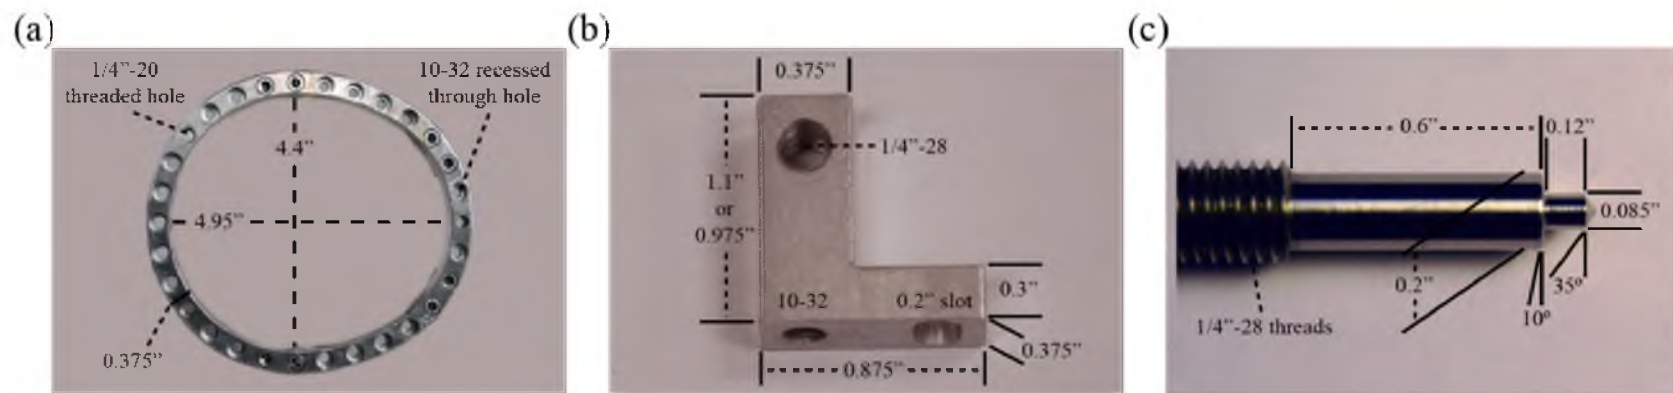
Device components with dimensions: (a) halo frame; (b) offset post; (c) modified titanium skull pin.
